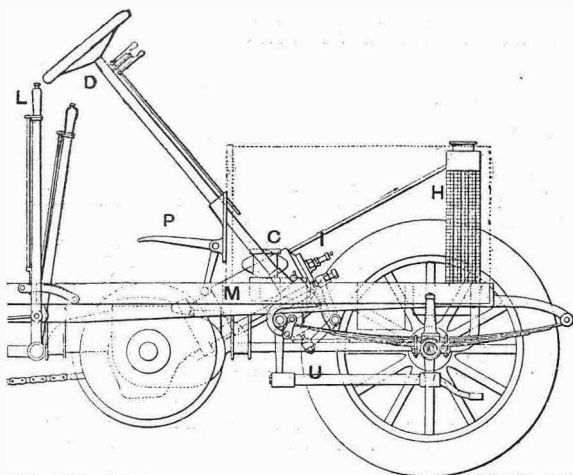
Front half elevation of the Motobloc car, showing the inclined position of the engine.
